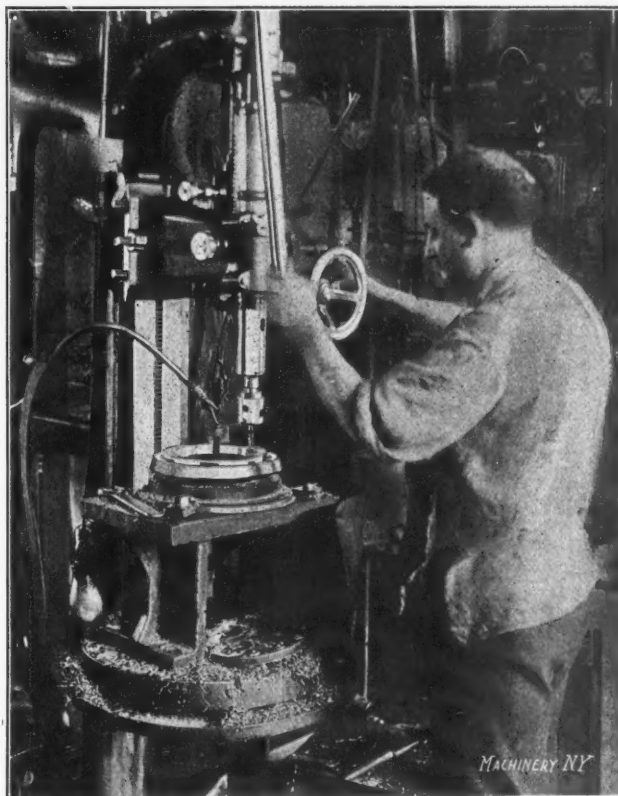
A Tapping Operation and Operator with a Remarkable Record—75,000 Blind 5-16-inch Holes in Chrome-nickel Steel without breaking a Tap
